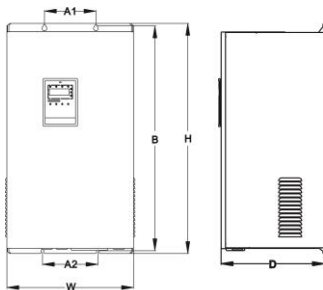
Outline dimensions and installation dimensions of wall-mounted energy feedback unit
